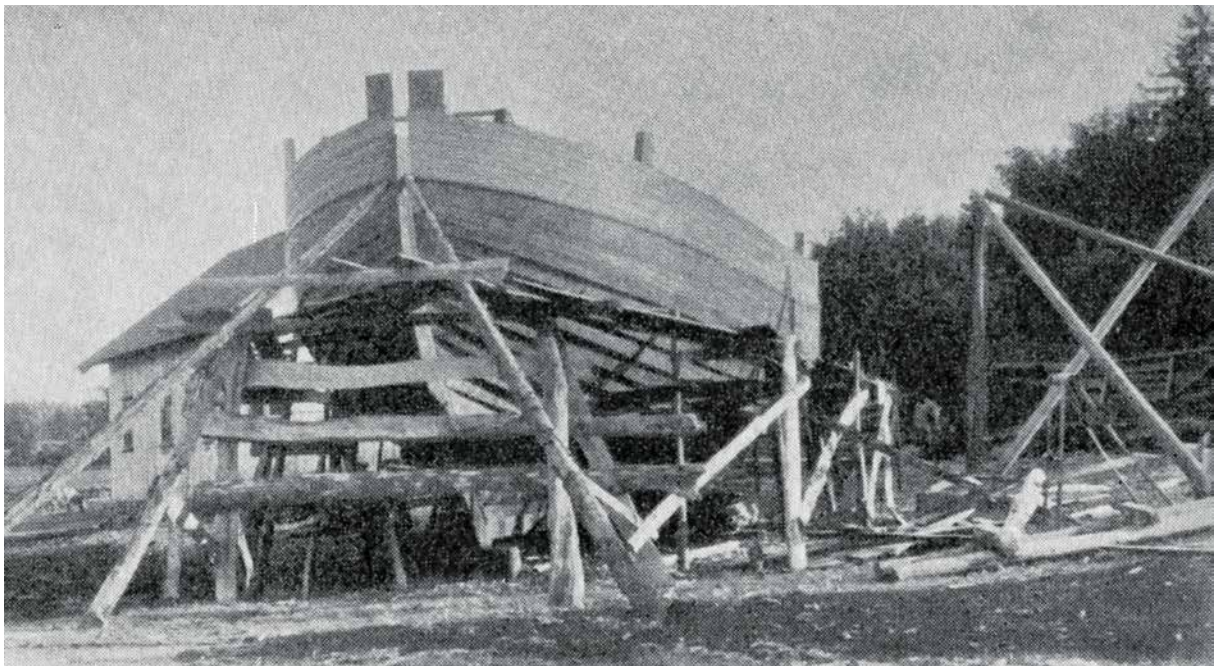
Anders Mattson's galley under construction in 1938 in Bohuslän, Sweden. The lower portion of the hull is clinker-built and the upper strakes are finished with carvel planks (after Haslöff 1970: Fig. 19).
